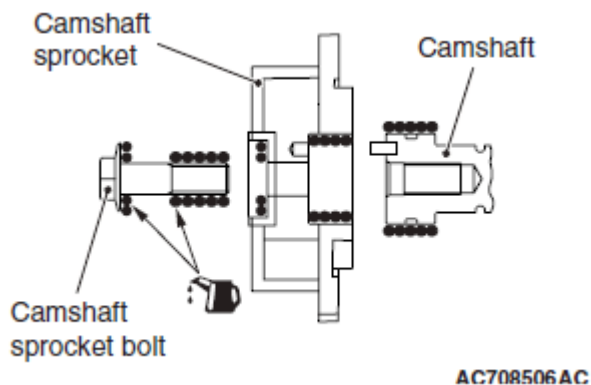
Identifying Camshaft Sprocket And Camshaft Sprocket Bolt
